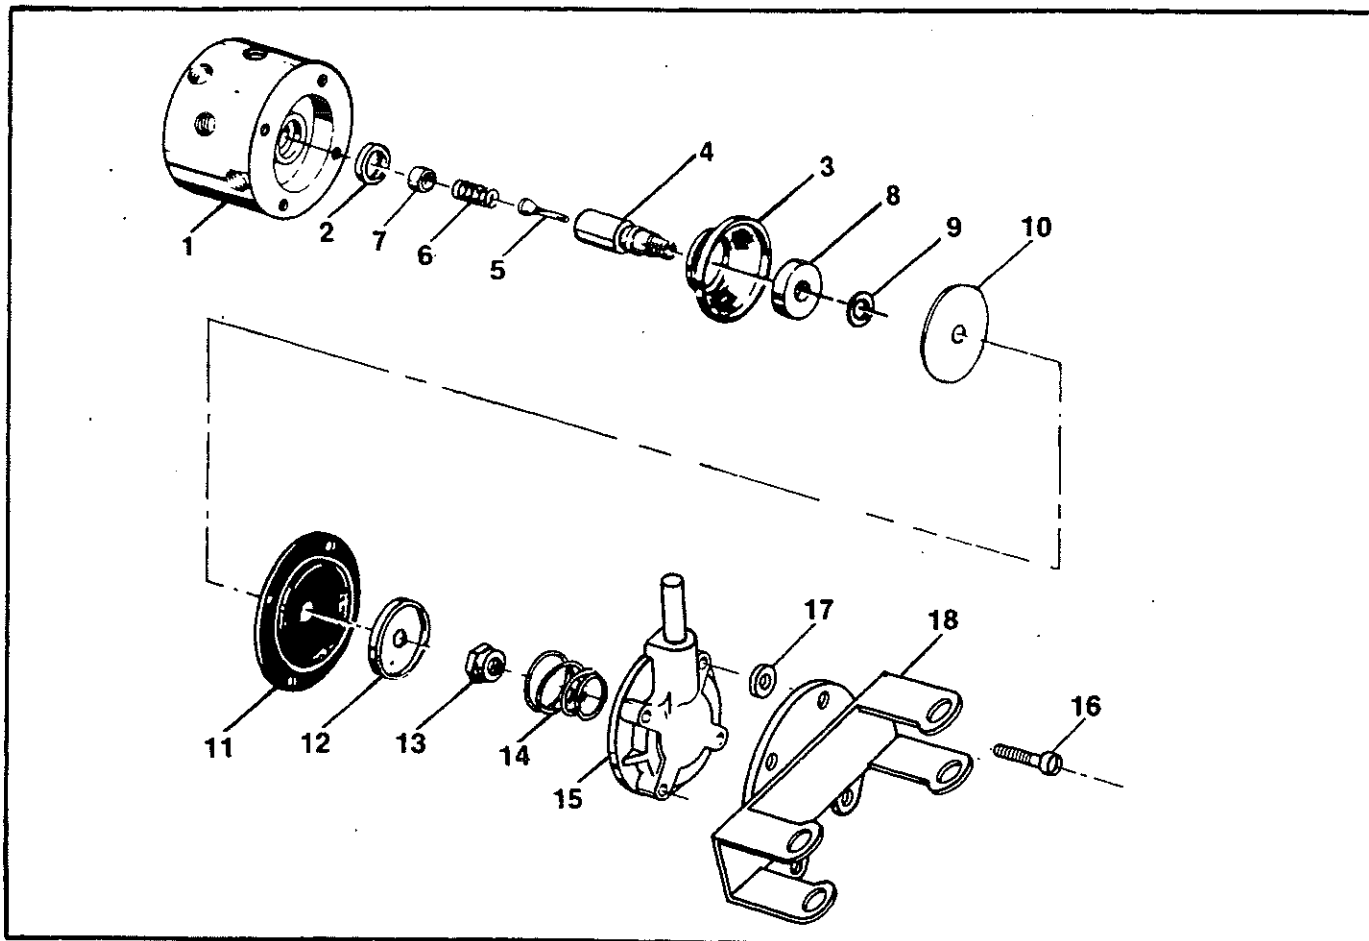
FUEL MANIFOLD VALVE ASSEMBLY.
